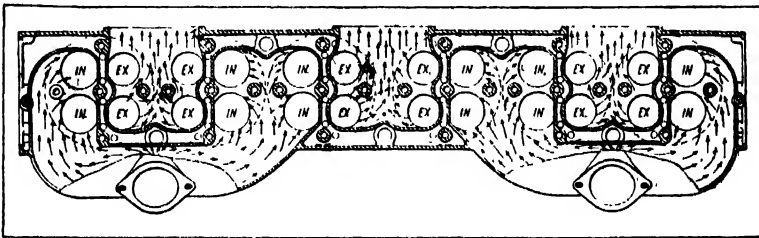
Sectional View of Packard Valve Housing Showing Location and Porting of Valves, Four Valves Being Used for Each Cylinder.
